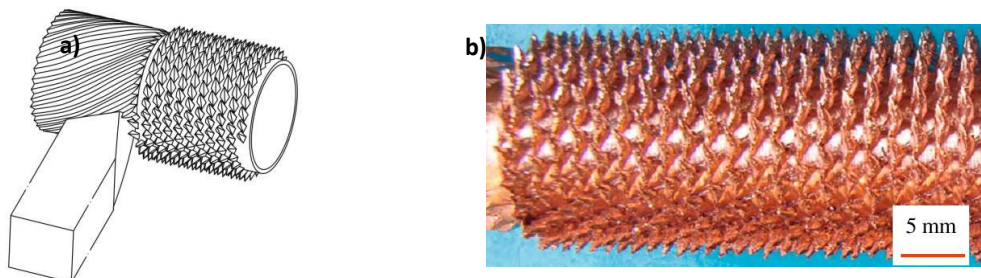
Sketch of fin forming by RWE (a) [8]; finned tube manufactured by RWE (b) [8]
